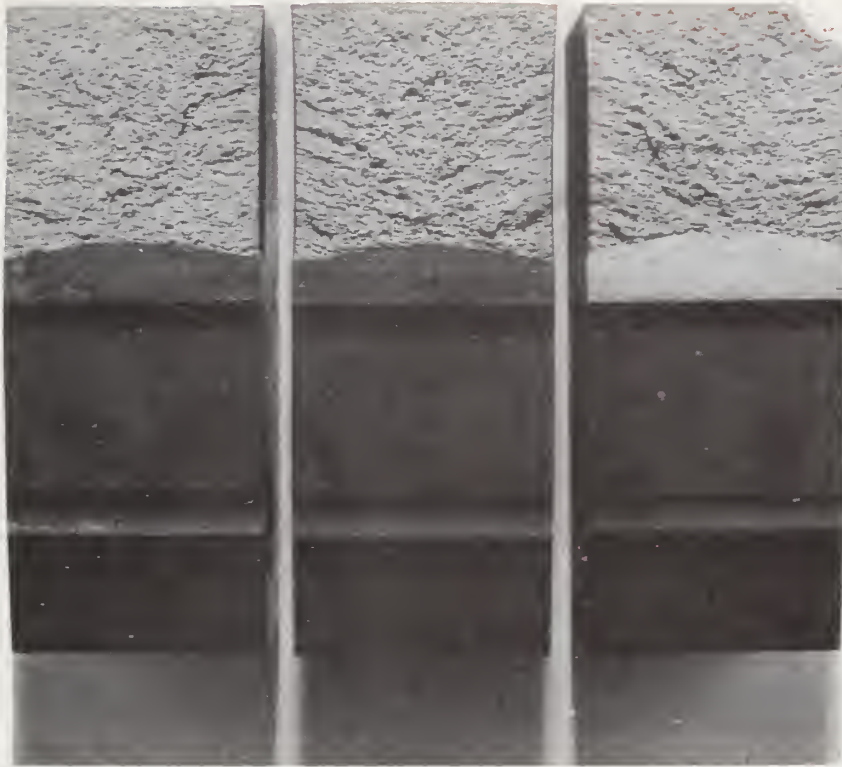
Fracture Surfaces of ASTM A-286 at 76 K
